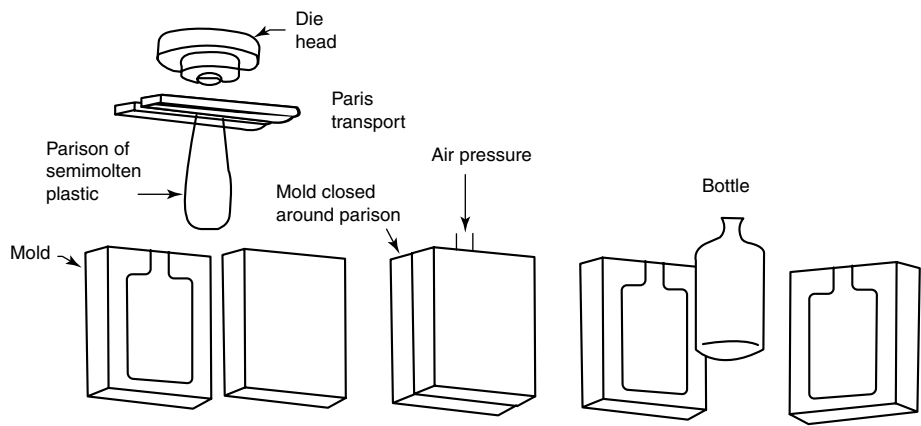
Continuous extrusion blow molding with parison transfer. The transport arm cuts the extruded parison from the die head and lowers it into the waiting mold.
